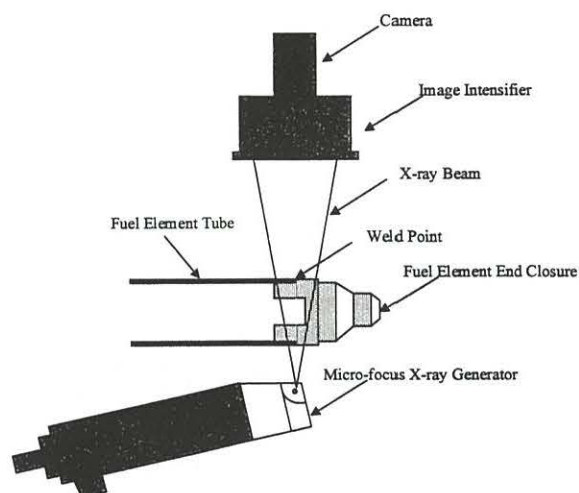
THE PRECISE X-RAY INSPECTION OF A FUEL ELEMENT
